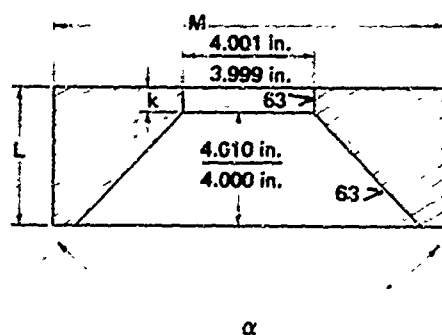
Dimensions of typical window mounting flange for 4-inch-diameter conical windows.
